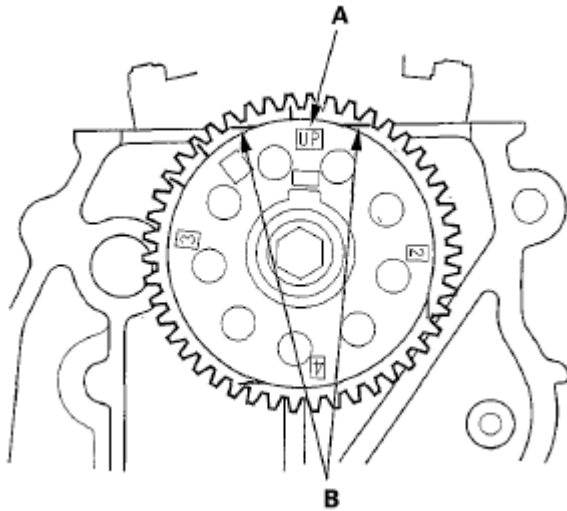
Identifying UP Mark On Camshaft Sprocket
